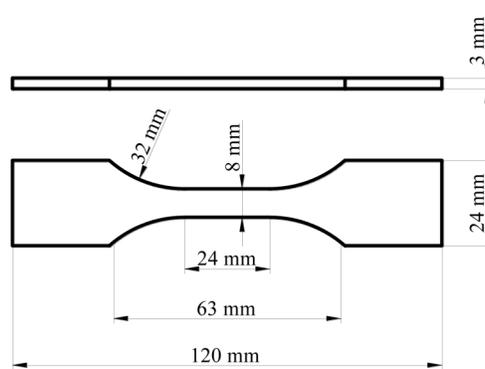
Shape and dimensions of the studied CNT/epoxy specimen.
